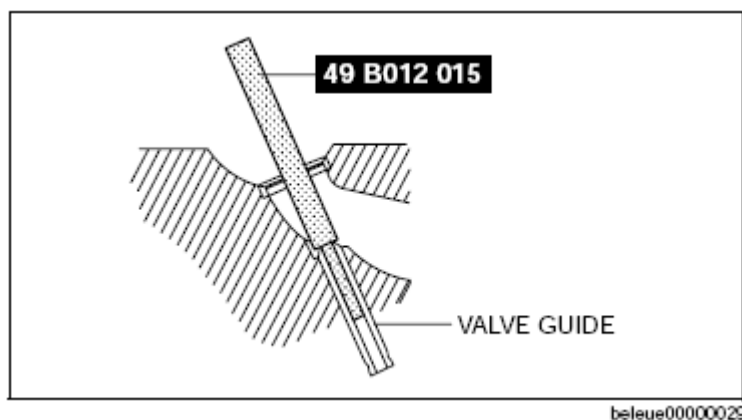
Removing Valve Guide From Combustion Chamber Side Using SST
